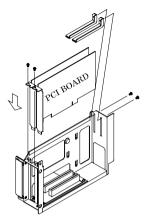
Setting the PCI Boards on the PCI Riser Bracket
